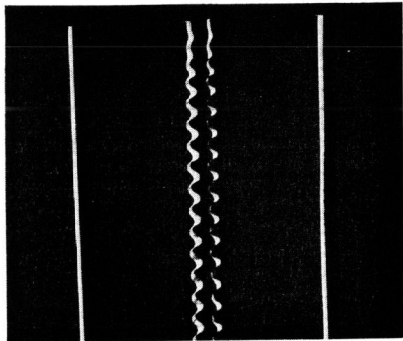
Corrugated edge made by severing with a moving impinging hot air jet.
